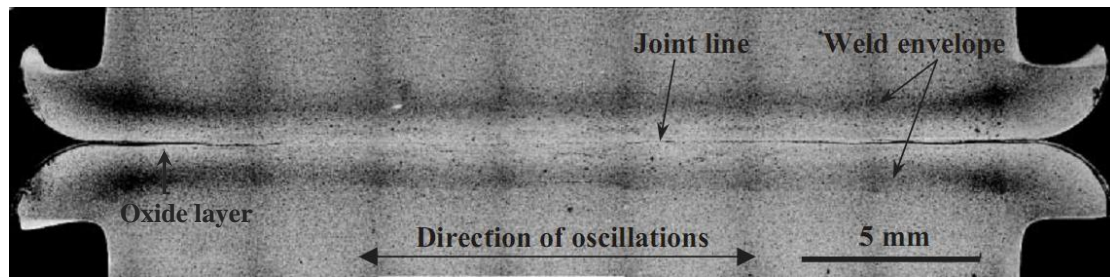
Optical macrograph showing oxide layer at the extremities of weld interface [42]
